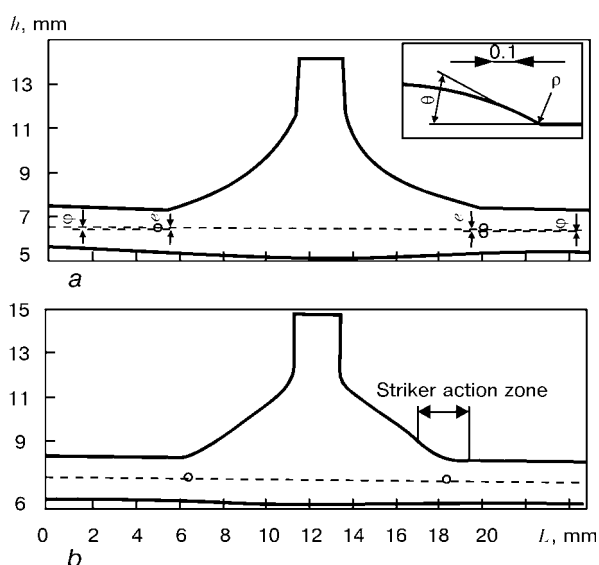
Profiles of welded joints in the initial condition (*a*) and after high-frequency peening of the surface layer of the metal on weld boundaries (*b*) (h , L — coordinates of measurements; points — projections of the axis, relative to which angular deformation proceeds)
